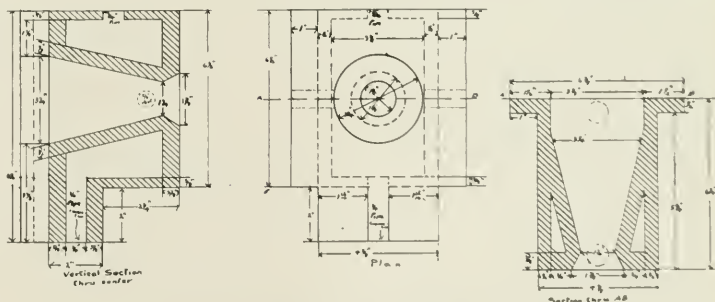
CINDER MONKEY OF CONTINUOUS ZINC FURNACE CO.
